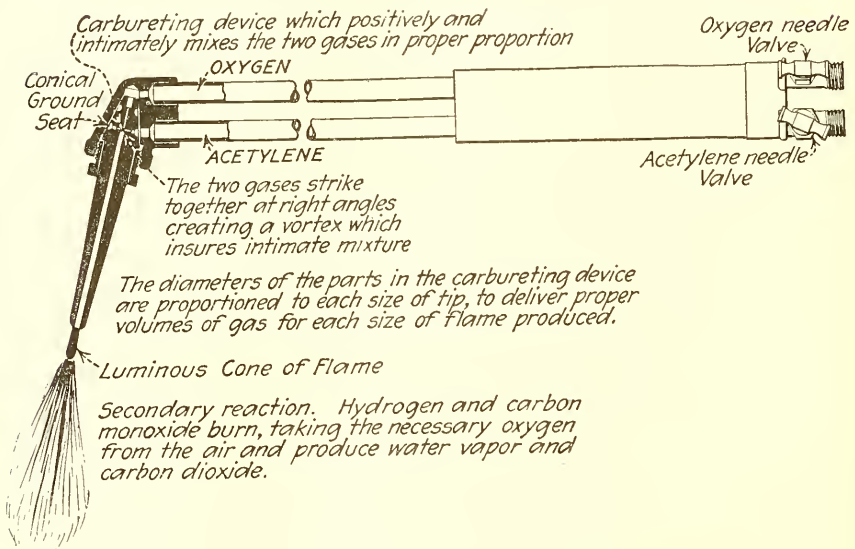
Details of the Davis-Bournonville Welding Torch.
